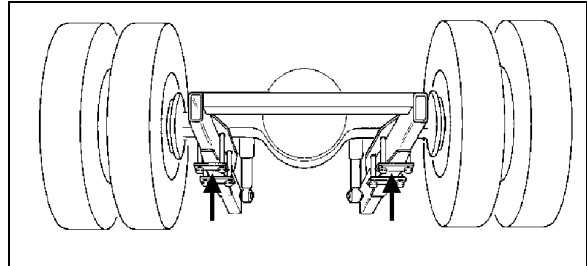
JACKING POINTS ON DRIVE AXLE 11005
